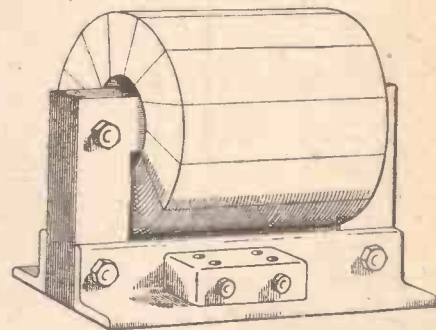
Stampings and coil assembled, showing air passage at the sides.
